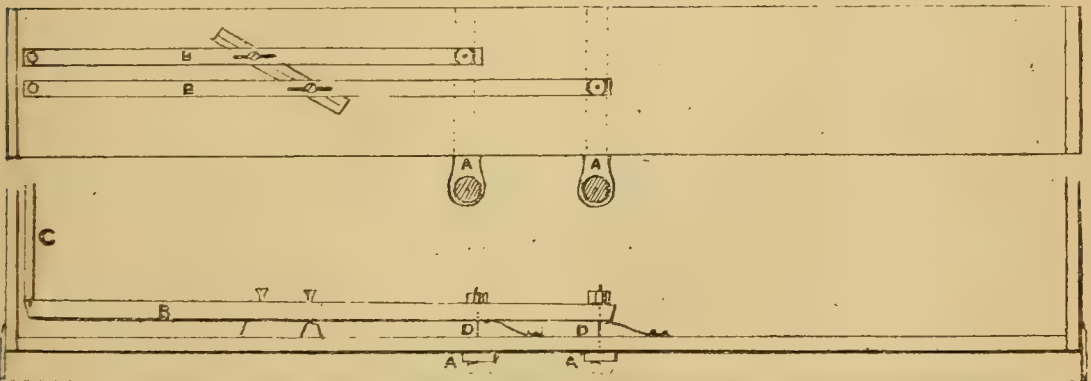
PLAN AND ELEVATION OF PEDALLING DRAWN TO SAME SCALE AS ACTION FRAME, FIG. 9, PAGE 489.
